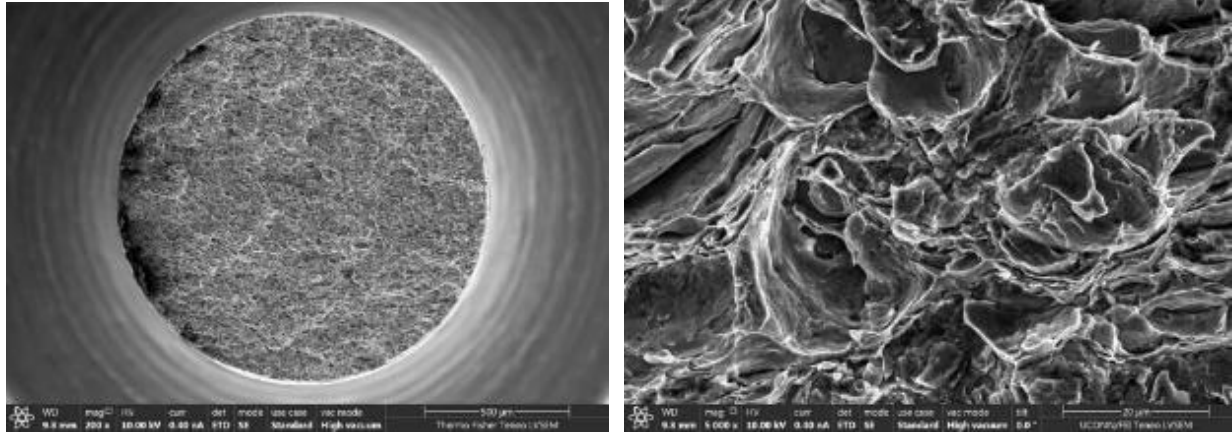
(a) Fracture surface of RH-95% specimen. The fracture surface is much flatter than other groups; (b) Magnified view of fracture surface.
